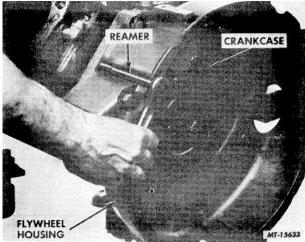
Reaming Flywheel Housing-to- Crankcase Roll Pin Holes
